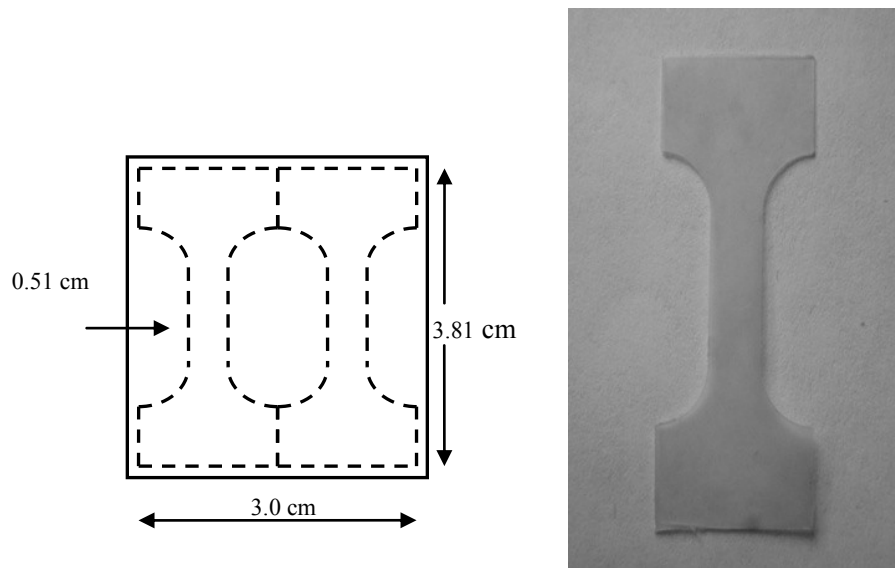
Schematic diagram with dimensions and a picture of dog bone shaped specimen cut from the plaque samples for tensile tests.
